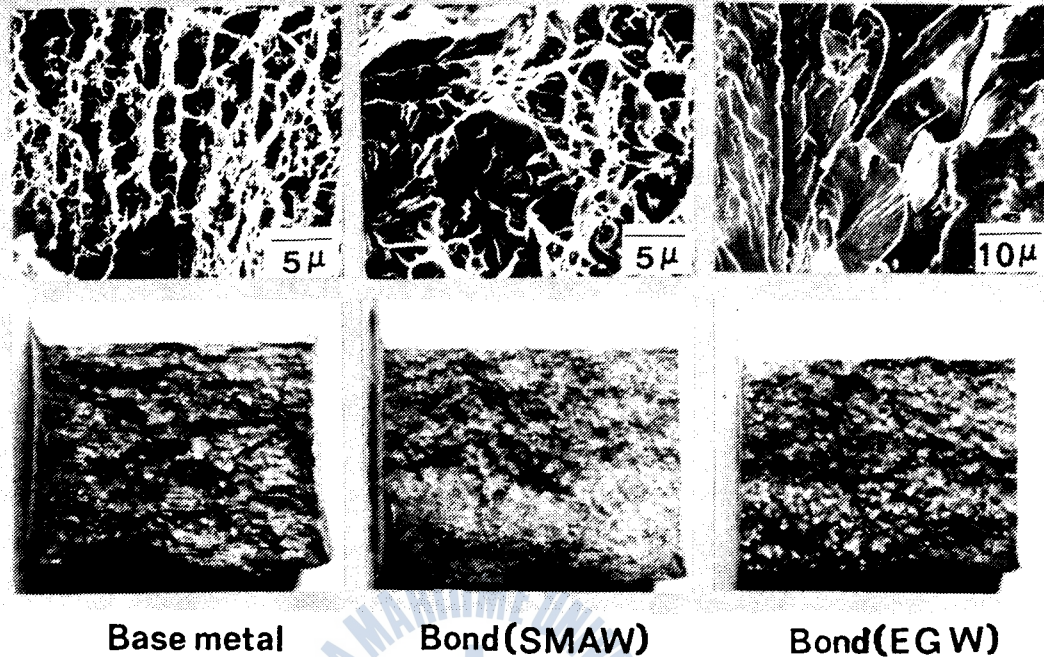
Macro-structure & Fractographs of welded Bond (-20 °C)
